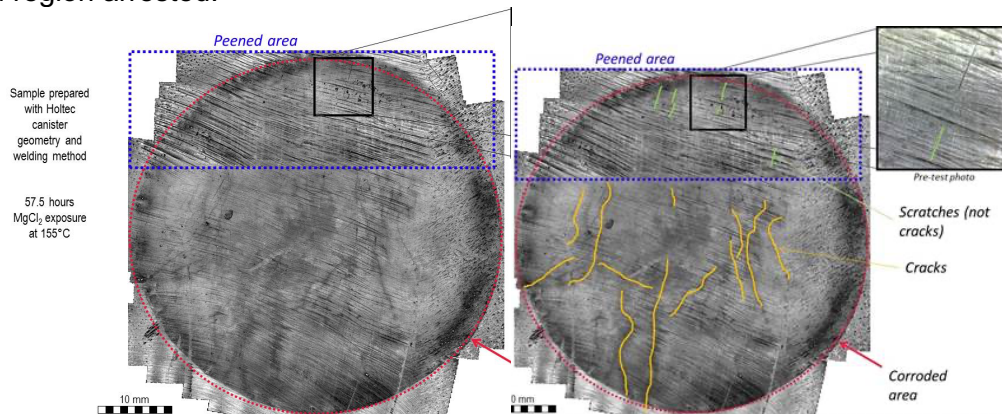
Welded test panel with laser peened and un-peened exposed areas
